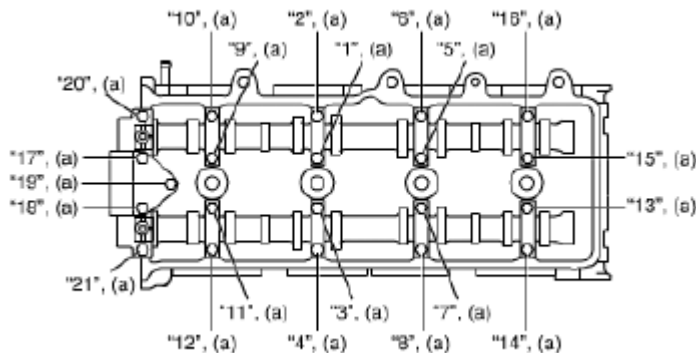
Identifying Camshaft Housing Bolt Tightening Sequence
